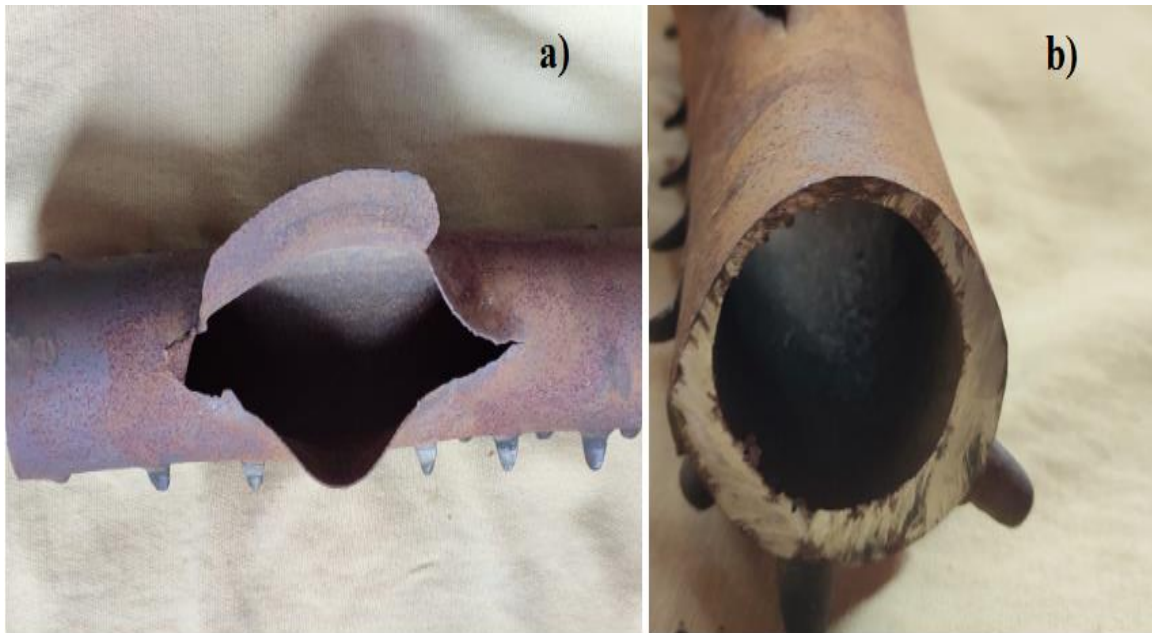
(a) Bursting of boiler bed coil tube, (b) thinning of wall tube due to erosion.
